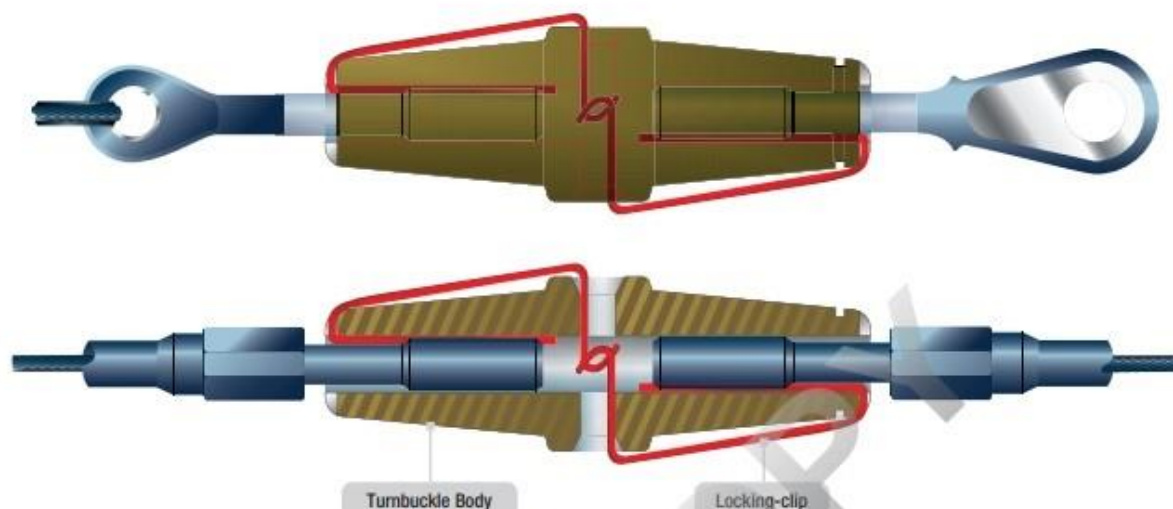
Typical turnbuckle assembly with locking mechanism.
